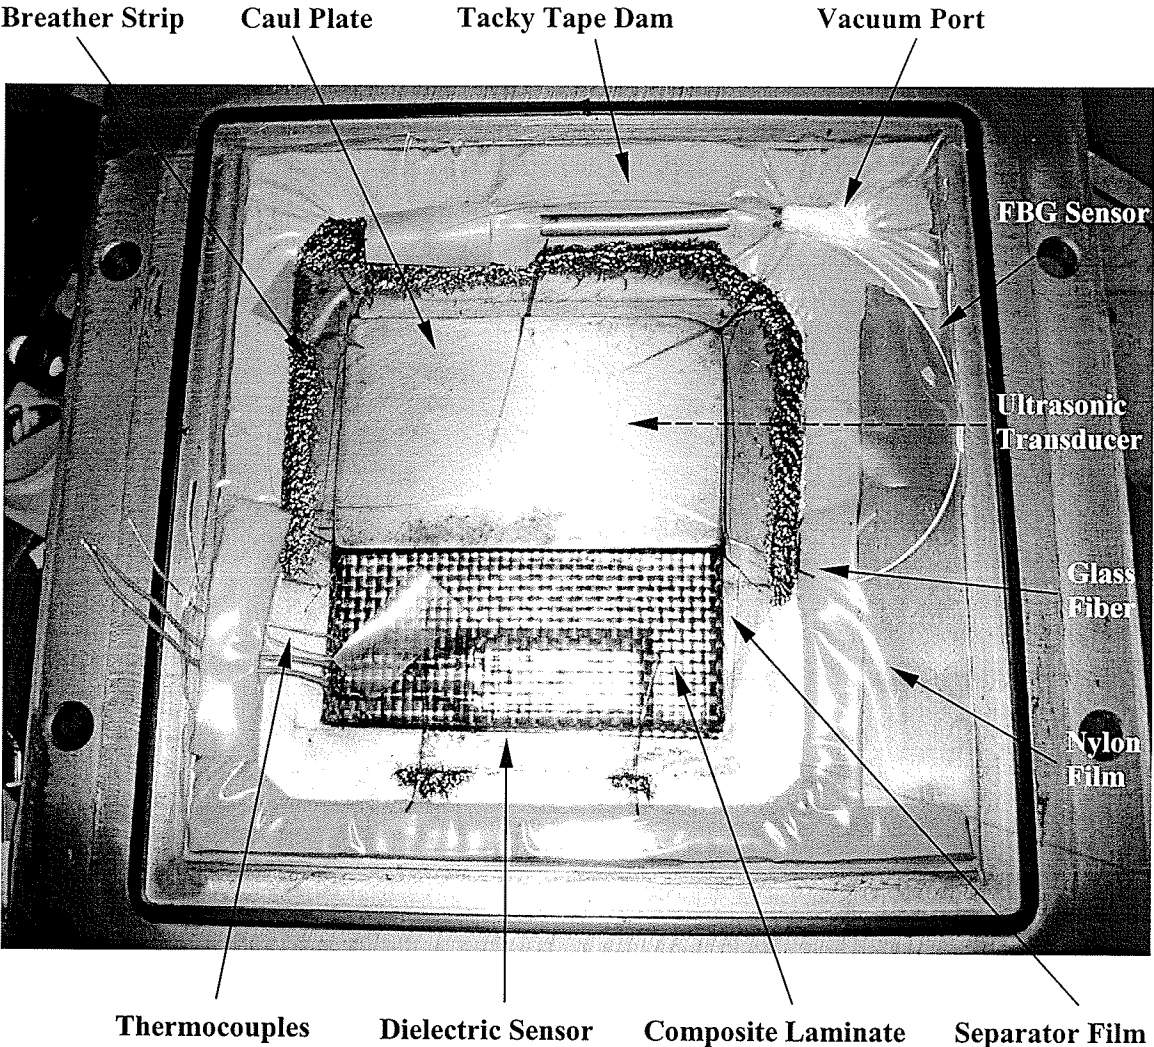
Vacuum bagging and sensor embedment (cured composite specimen)
